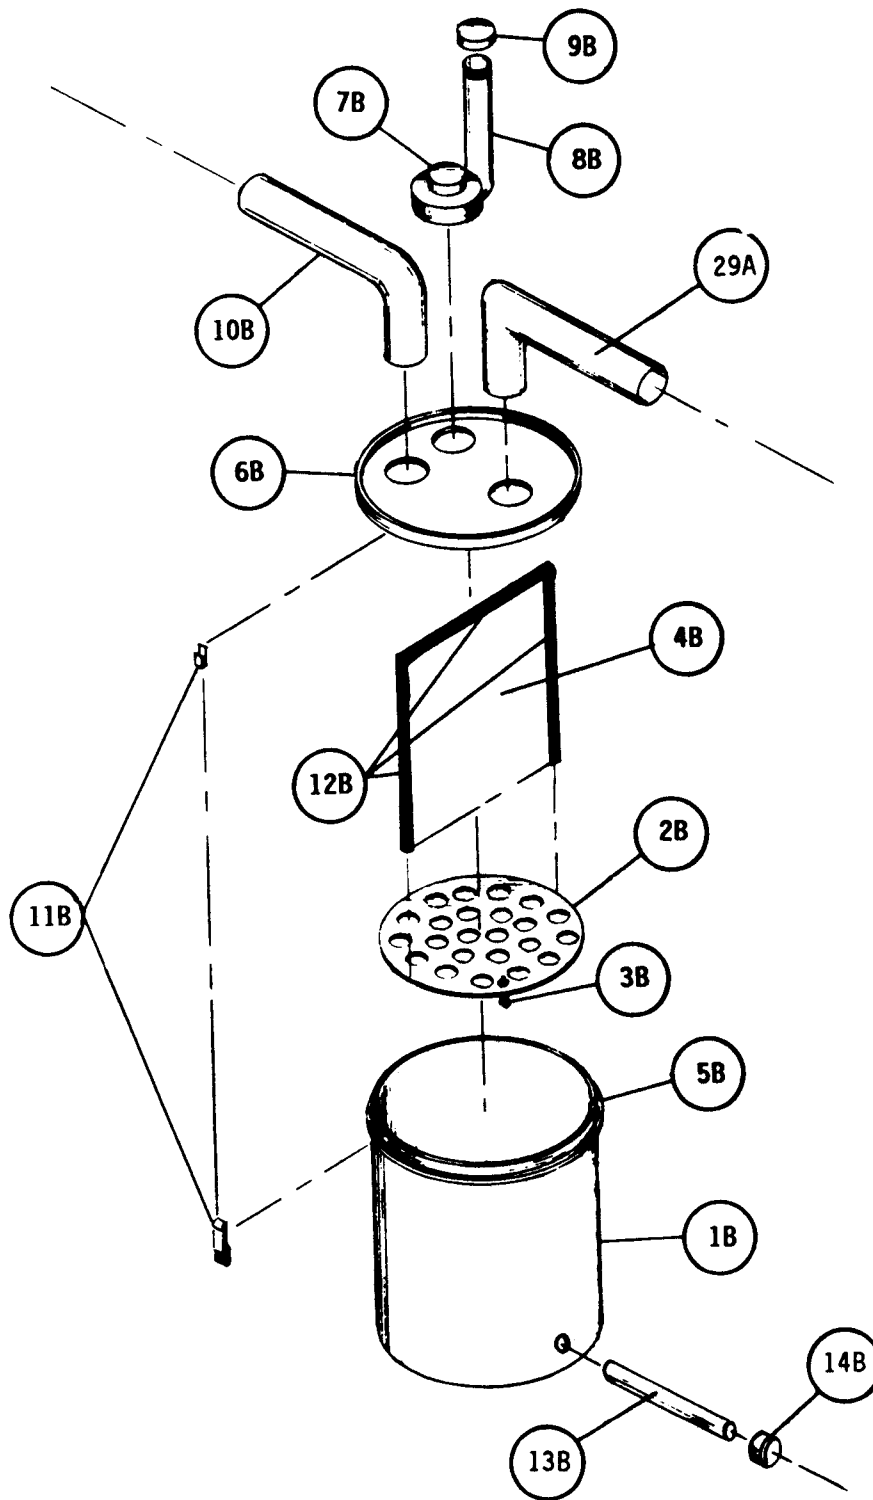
Exploded, schematic diagram of the filter unit.
